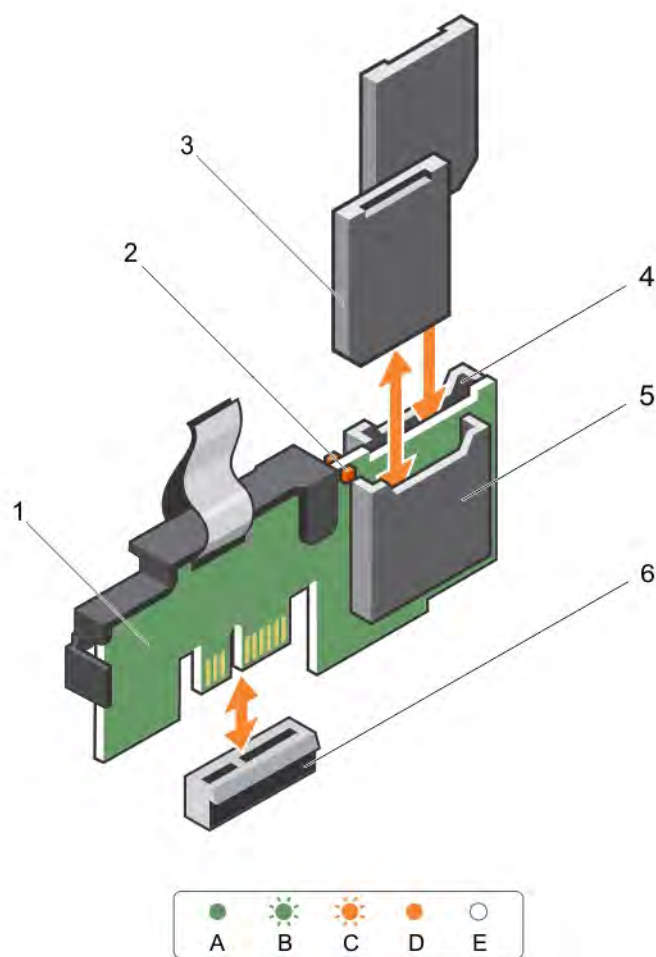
Removing and installing the Internal Dual SD Module (IDSDM)
